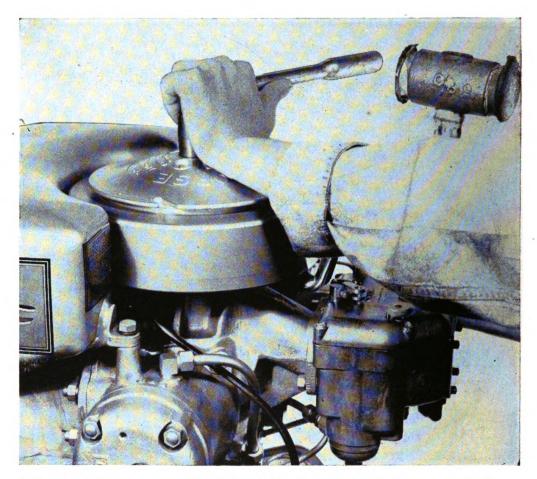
Using wrench on flywheel nut. (Strike wrench with hammer or mallet to loosen flywheel from crankshaft.)
